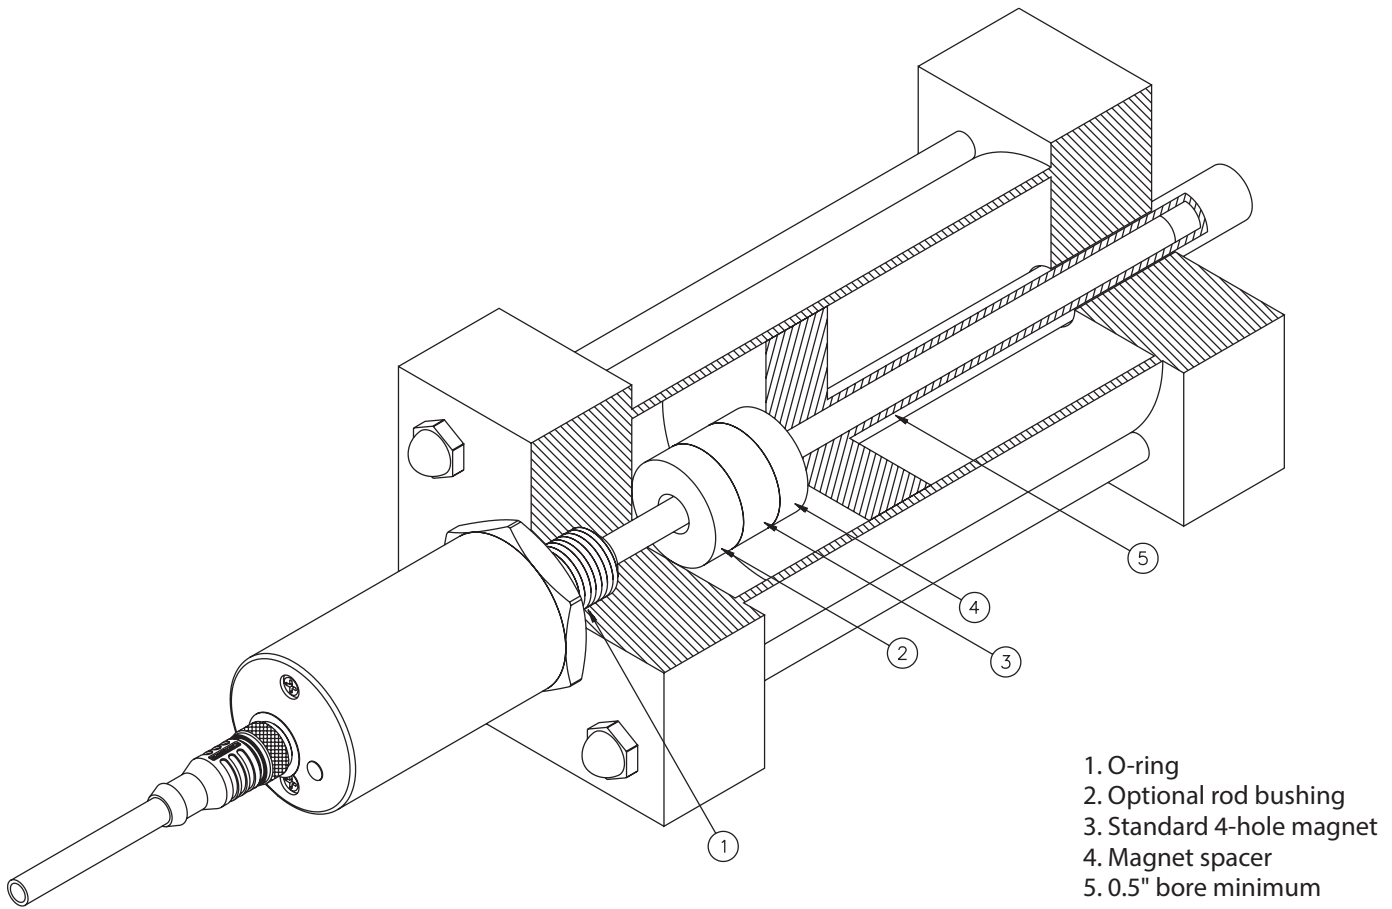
Mounting EZ-track in a Hydraulic Cylinder
